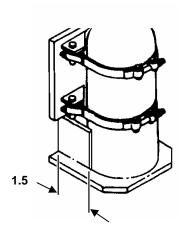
Fire Extinguisher Bottle Holder Shield
